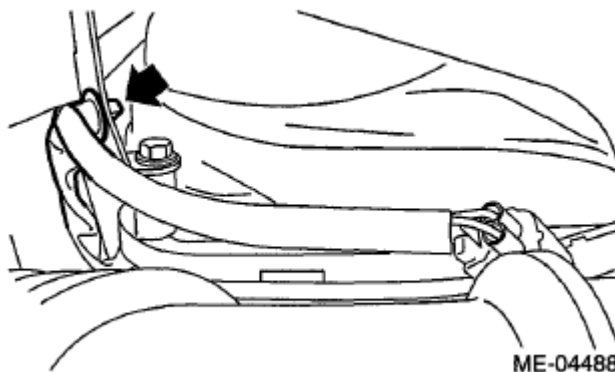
Locating Front Oxygen (A/F) Sensor And Rear Oxygen Sensor Connectors
